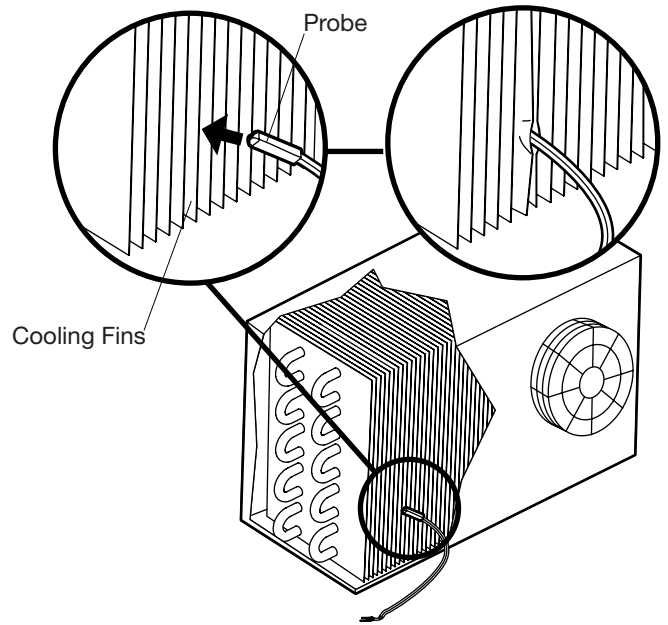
Insert Thermistor Probe between Evaporator Cooling Fins
